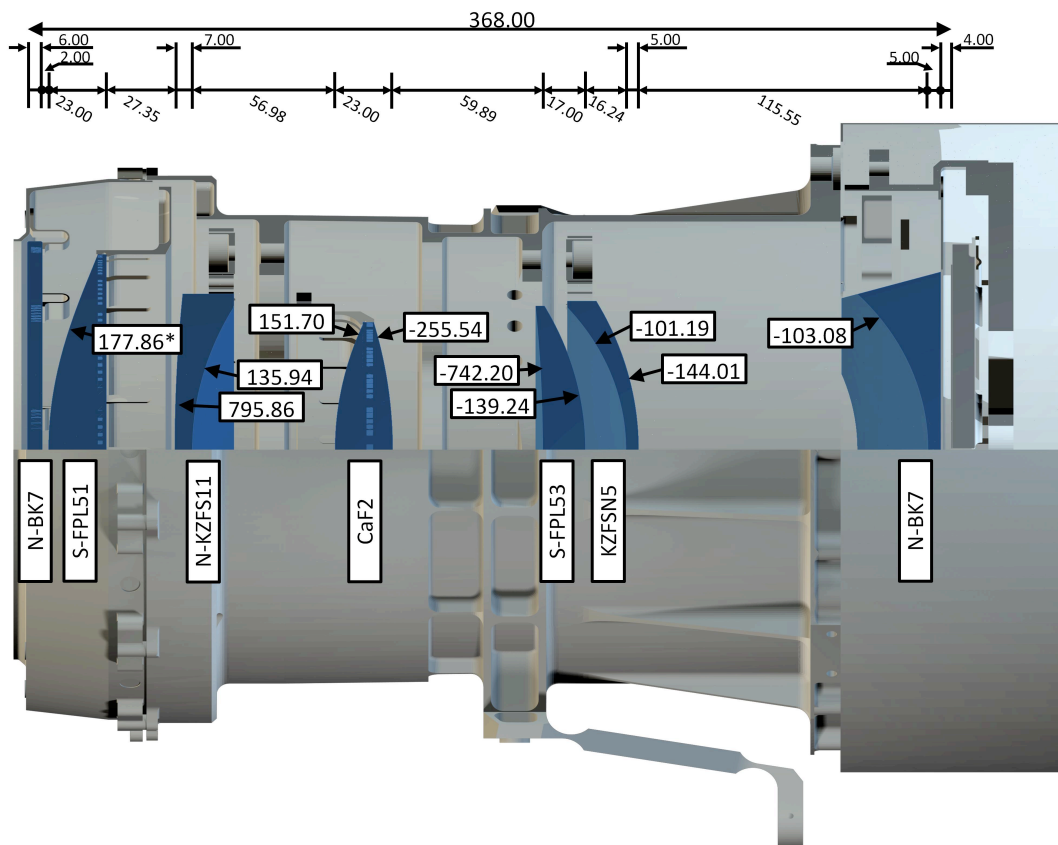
The baseline optical layout is shown together with a cross section of the mechanical envelope. One of the attachments point to the optical bench is visible in the lower part while the baffle is missing in this drawing. The structure of the focal plane assembly with the detectors is also seen (at the right side).
